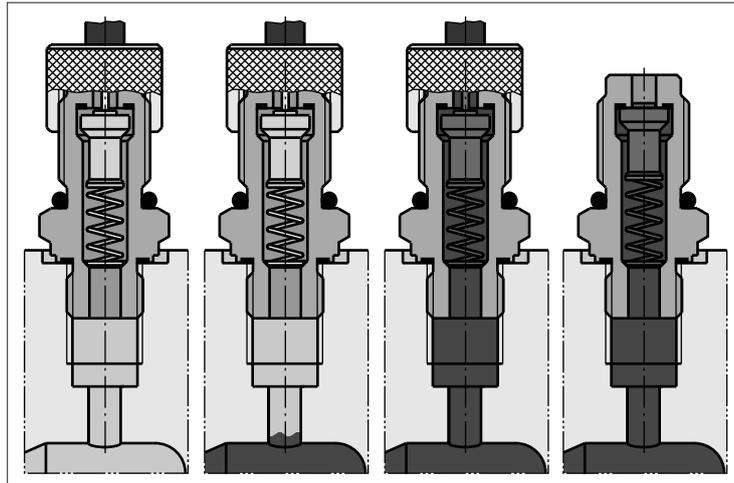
Filling and bleeding hydraulic cylinders with measuring coupling
